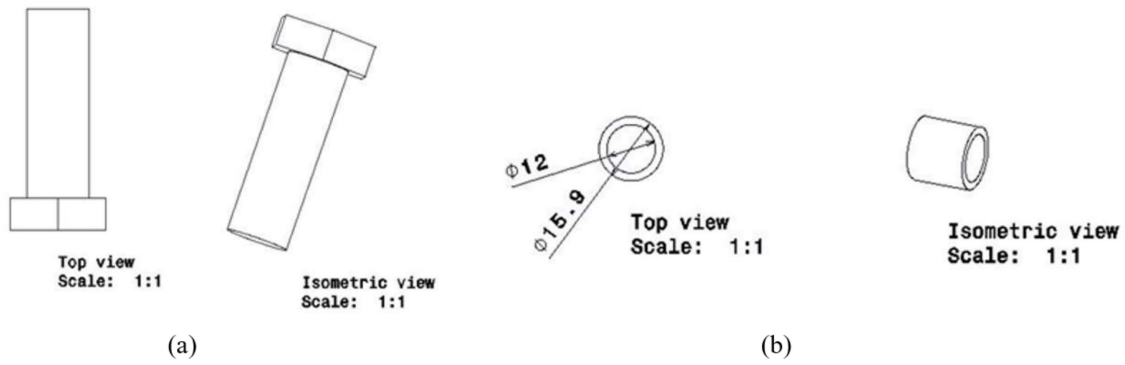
(a) Drawing of bolt (b) Drawing of sleeve
